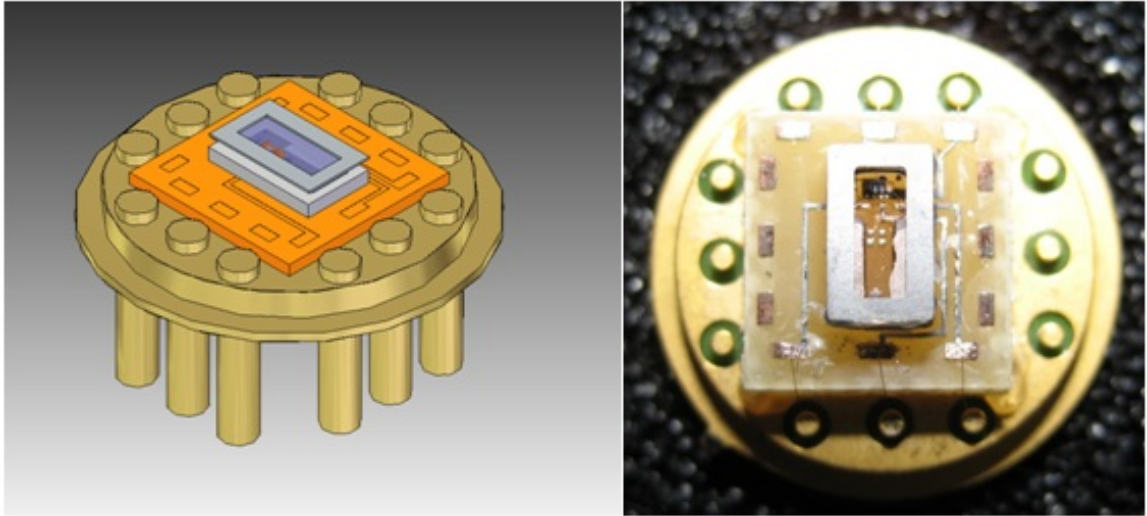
Package with 100 μm spacer attached: a trimetric view schematic (Left), an image of a device (Right)
